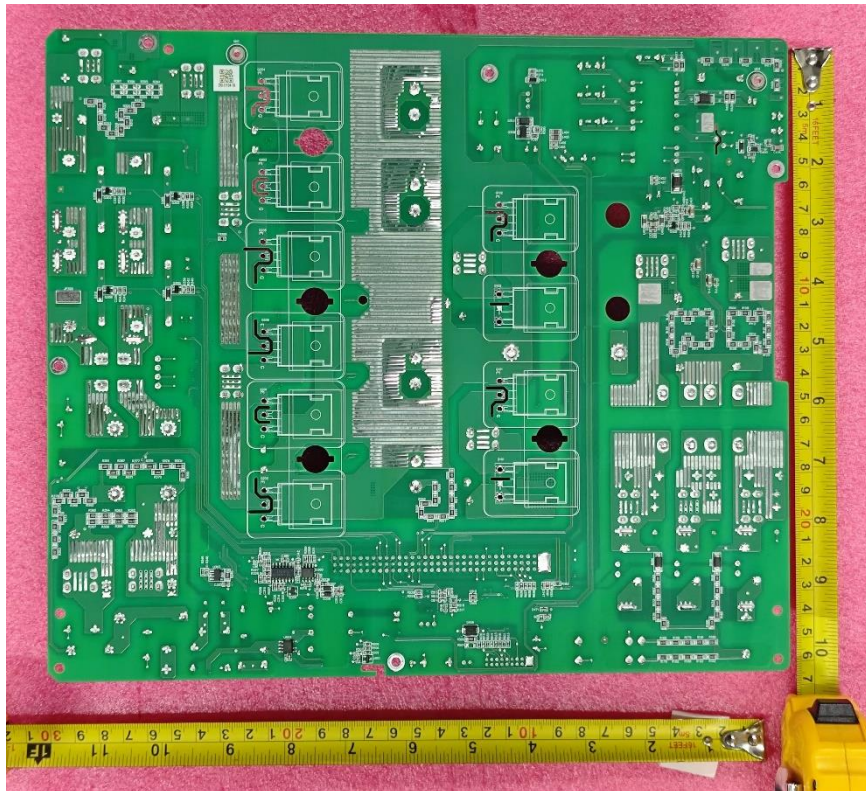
Bottom side view of power board for models GW6K-DNS-G40
